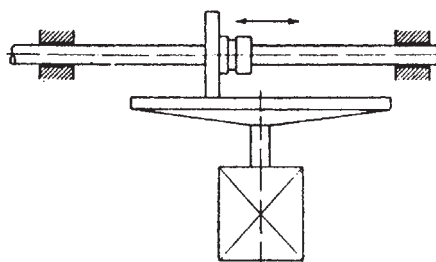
Friction gears: crown gear with sliding gear wheel.
